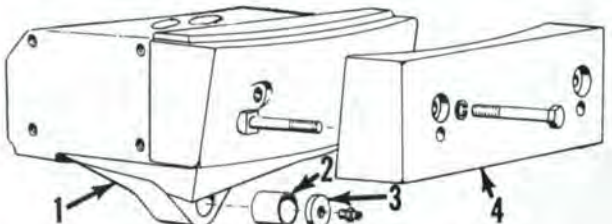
View of front support casting and related parts. Additional flat front weights can be bolted onto the weight shown.
